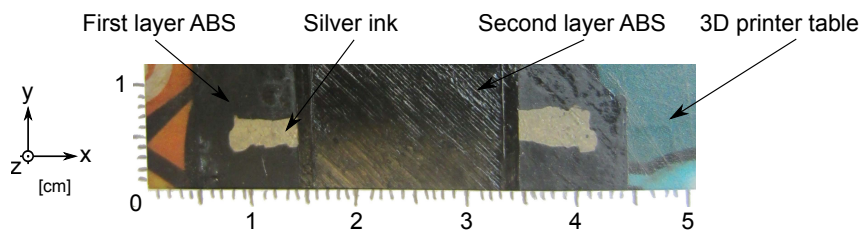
Test of a combined 3D/2D printer printed structure.
